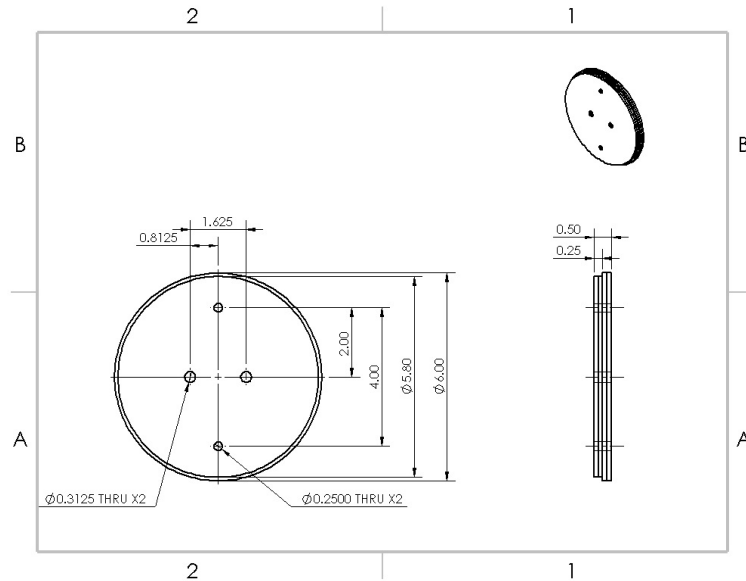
Dimensioned drawing of the avionics bay bulkheads.
